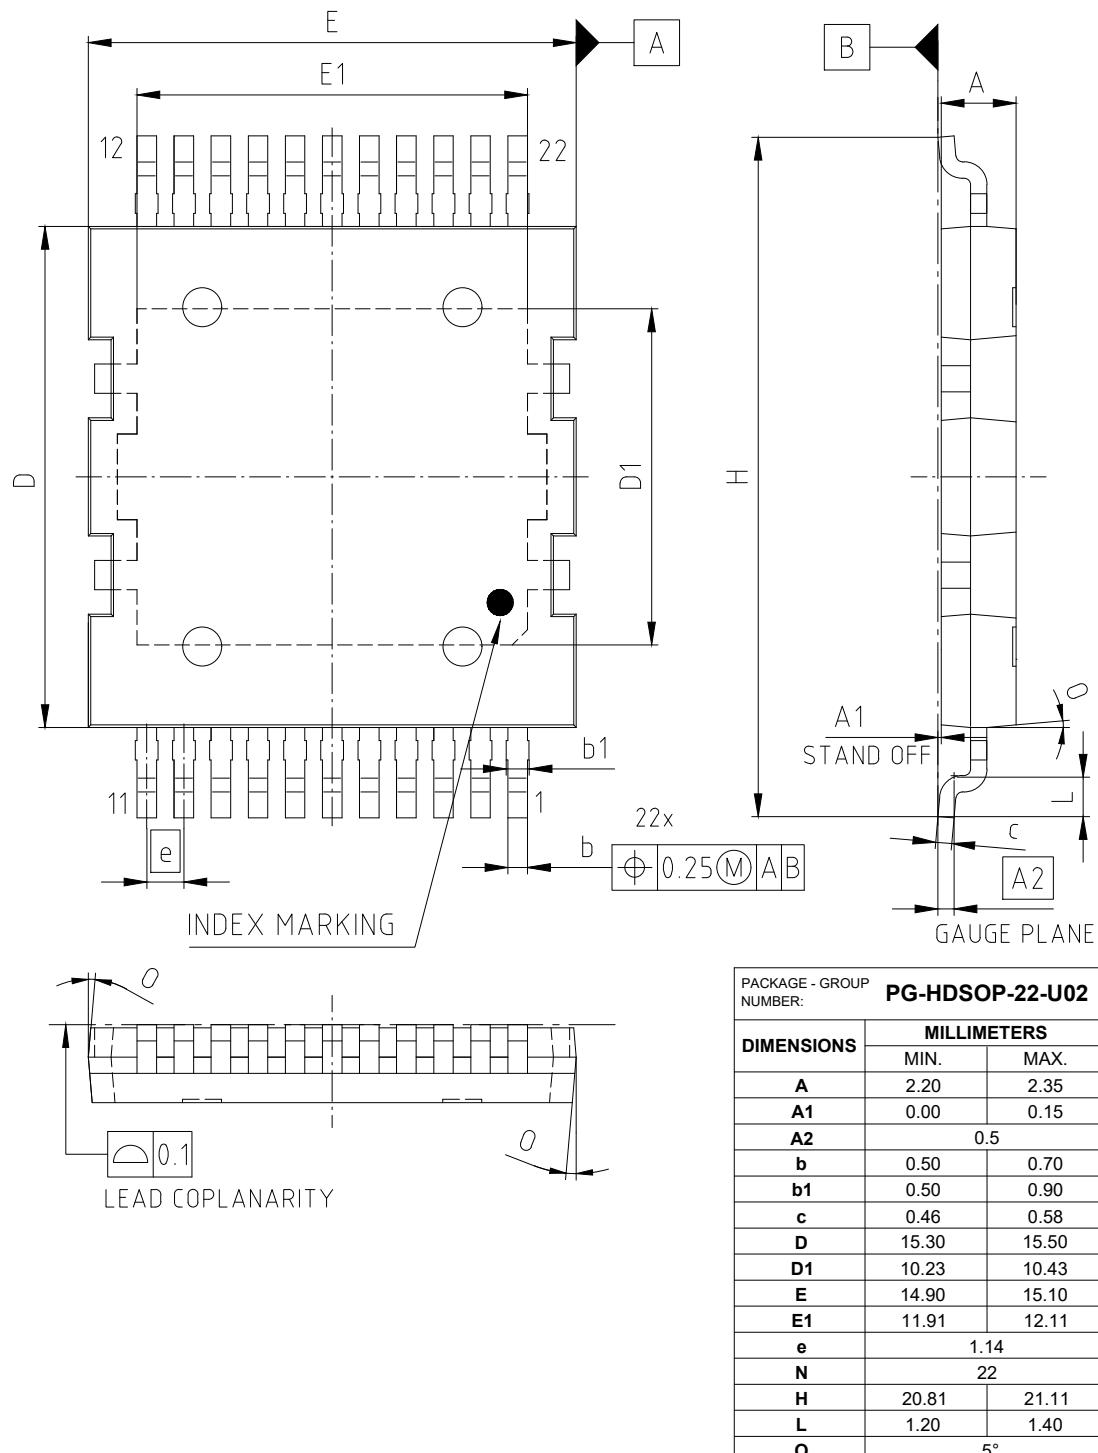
Outline PG-HDSOP-22, dimensions in mm
